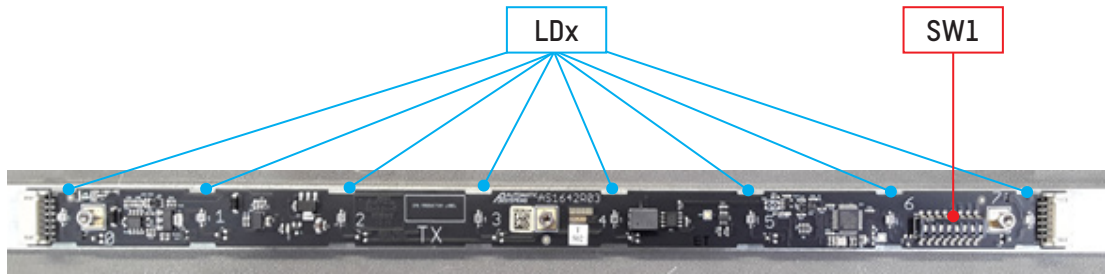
DIRAS Transmitter Circuit Board AS1642
